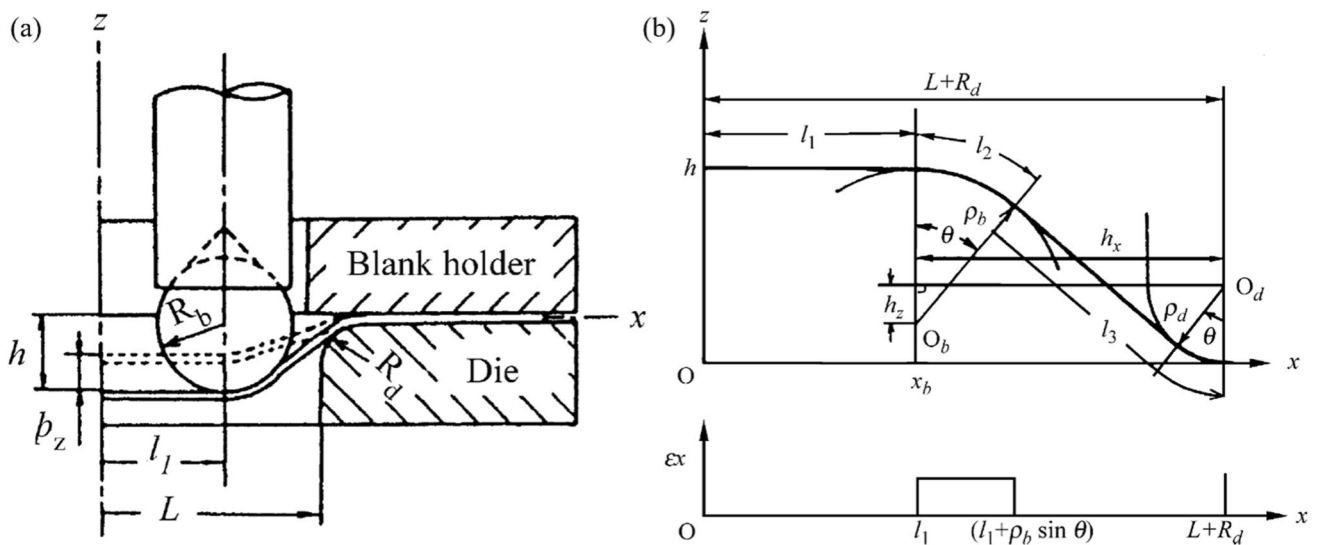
Ball-roller tool and working mechanism. a Section view of the ball-roller tool, b plane-strain deformation of the ball-roller tool [63]
